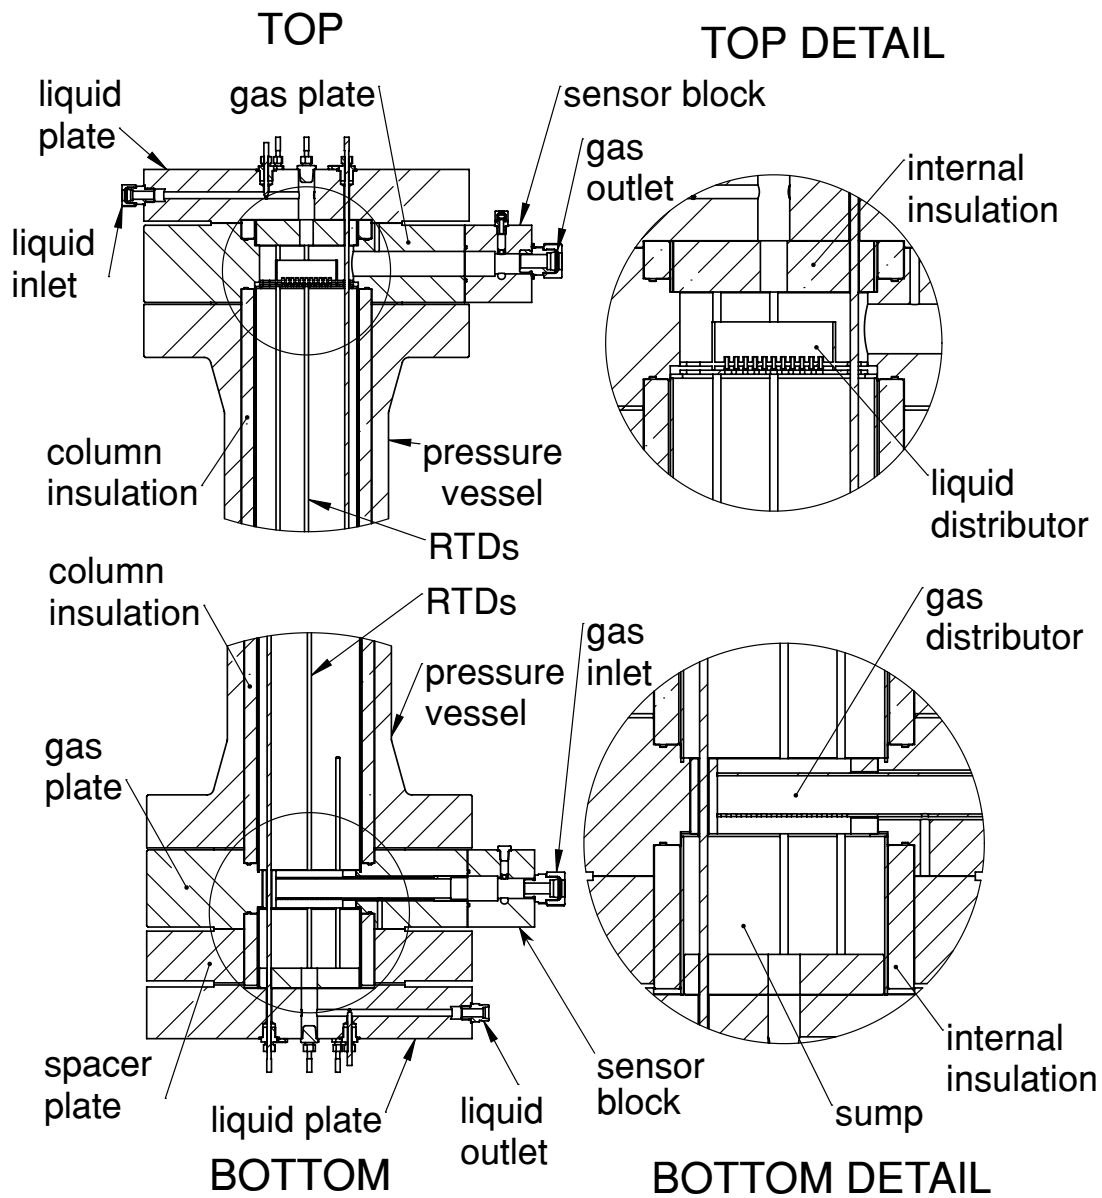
Cross-sectional view of top and bottom of column assembly showing gas and liquid distributors, Superwool internal insulation, and RTDs.
